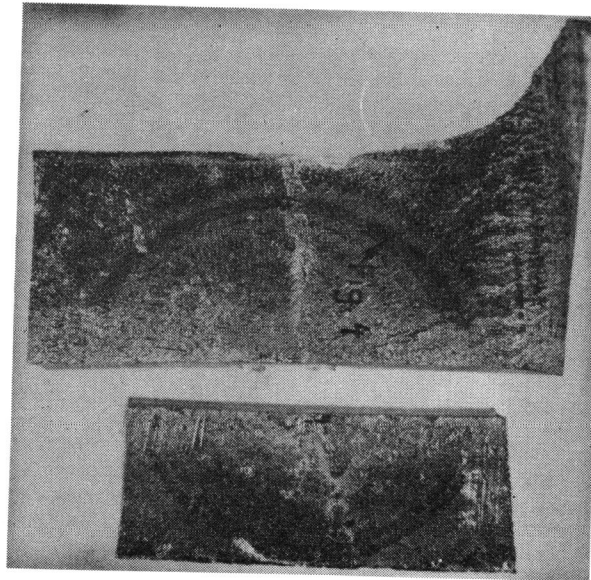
Macrofotographs of the Crack Surface of the Main Crack (Pores and Arrest lines)
